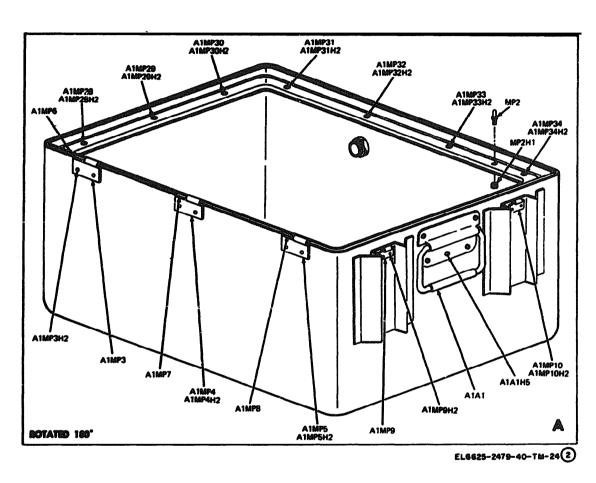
Case assembly 1A1, parts location (part 2 of 2).
